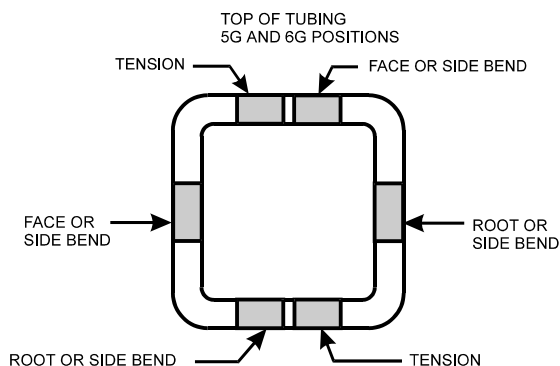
Location of Test Specimens for Square and Rectangular Tubing (see 5.17.4.3)
